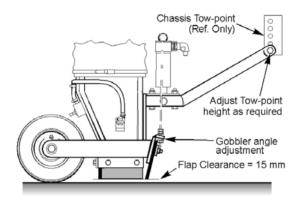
Suction Nozzle Clearance - Factory Set-up
